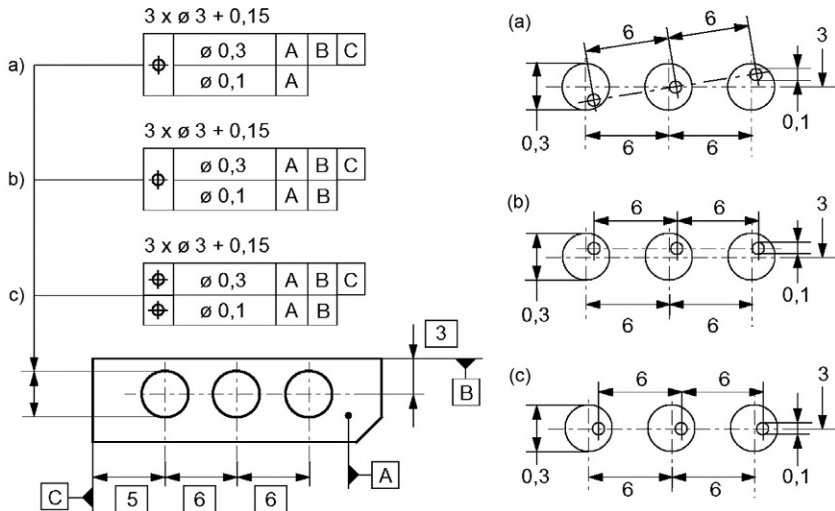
Composite tolerancing a), b) and single tolerancing c)
